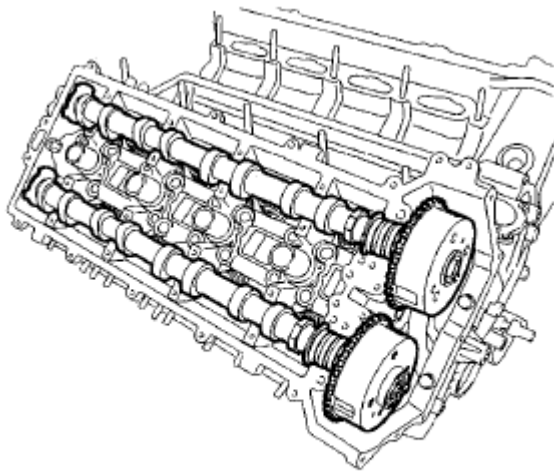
Identifying Camshaft Bearing Caps And Camshaft Thrust Bearing Cap Bolts
